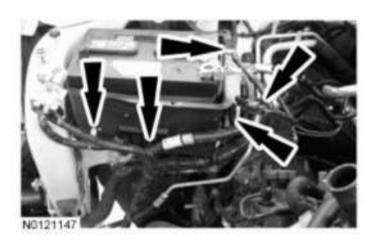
Locating Wiring Harness Connectors Courtesy of FORD MOTOR CO.
